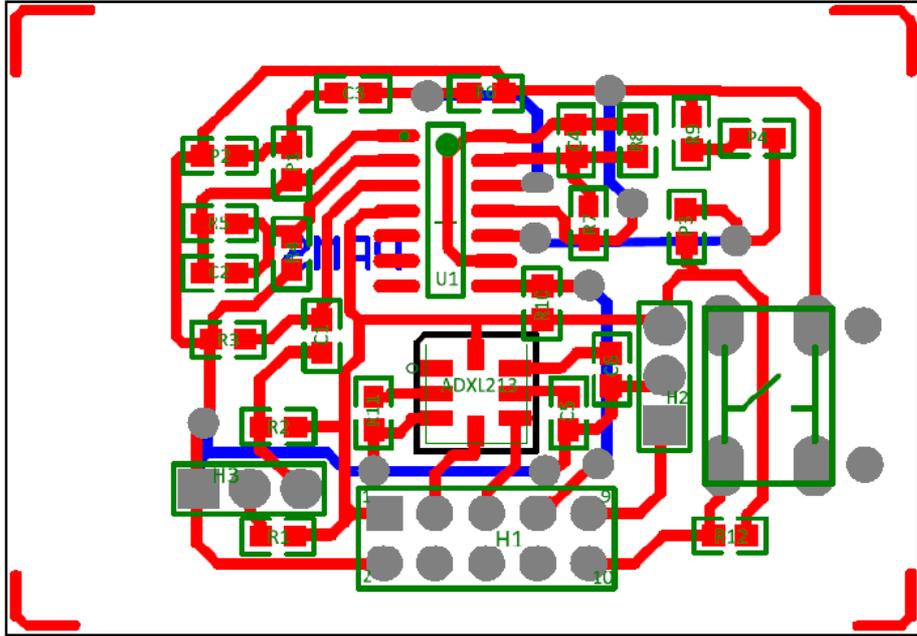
PCB Layout of sensor unit (top and bottom layers)
